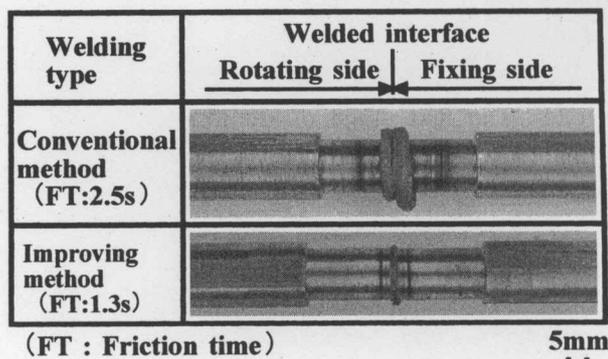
Appearances of welded joints after welding by the conventional method and experimental method (2) in friction pressure 30 MPa and friction speed 27.5 s^{-1}
